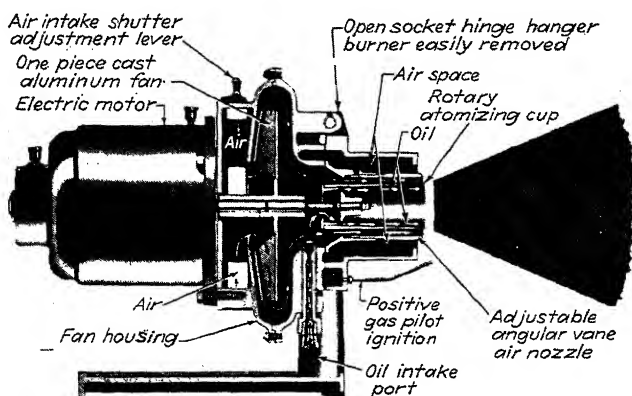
Horizontal-shaft atomizer (cup type)—adjustable air supply from fan discharge.
